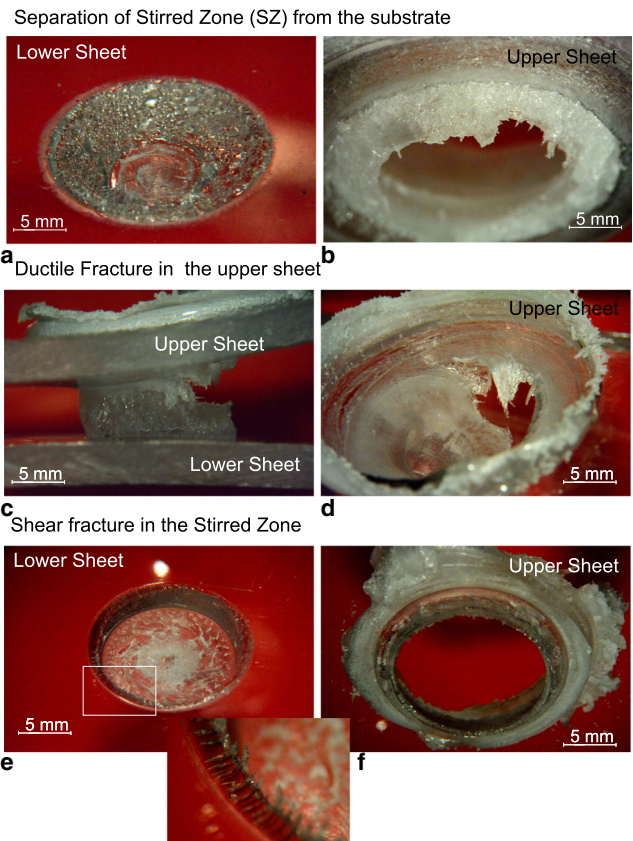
Macrographs of ductile fracture modes developing in FSSW welds
